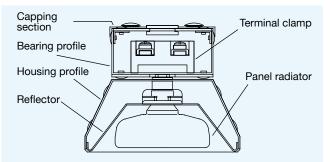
Cross-section through an EBI construction element Dimensions in mm
